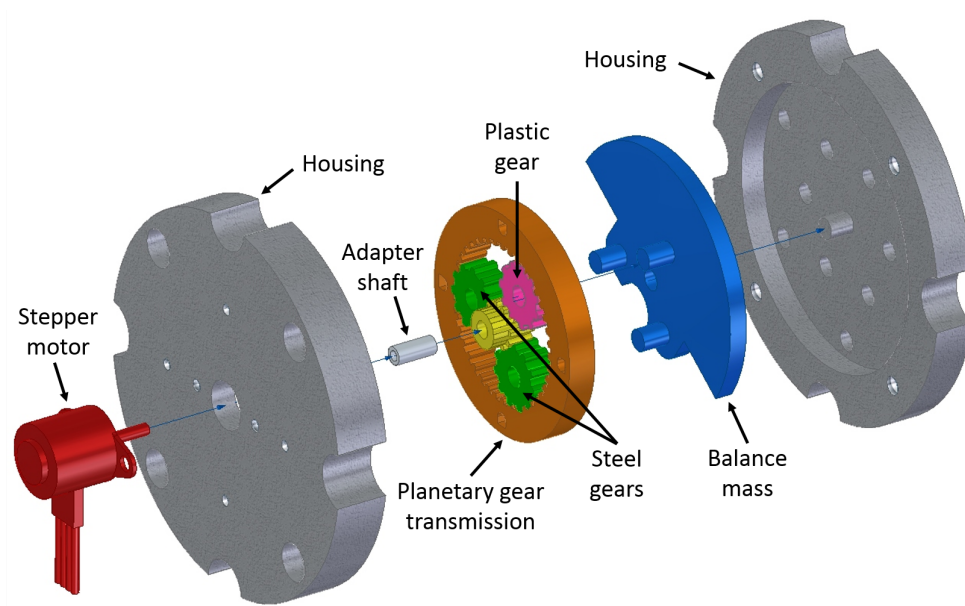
Exploded view of the mechanical components in one of the actuation modules. Two modules together form a single actuator.
